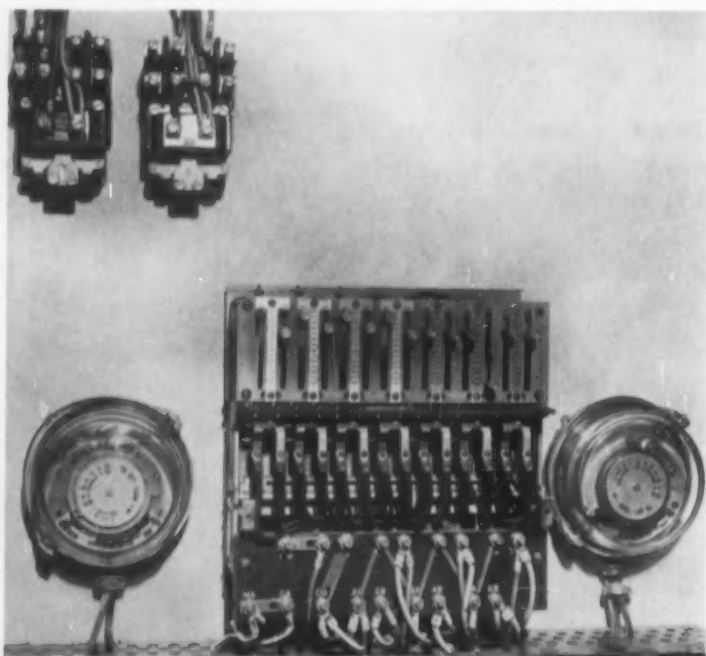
Seven timers (center bottom) control the automatic forming cycle on the four-station thermoforming machine shown in Fig. 3, p. 121. They are located at the rear of the machine and are out of sight in Fig. 3. At end of cycle, the first timer resets all timers
